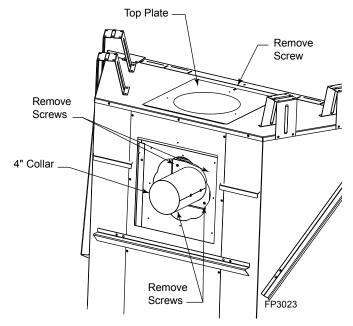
Remove 4" Collar and Gasket and Top Plate
